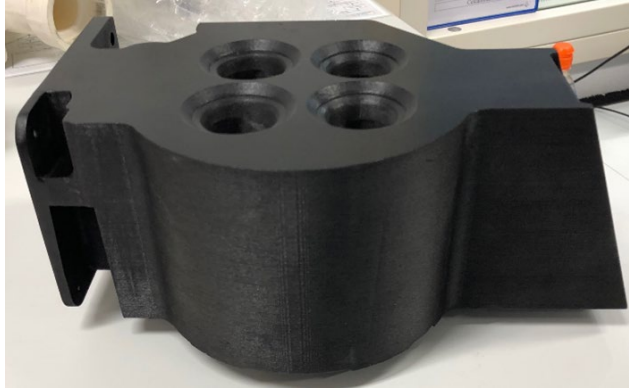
Example of MX-11 3-D printed cylinder head for flow testing
